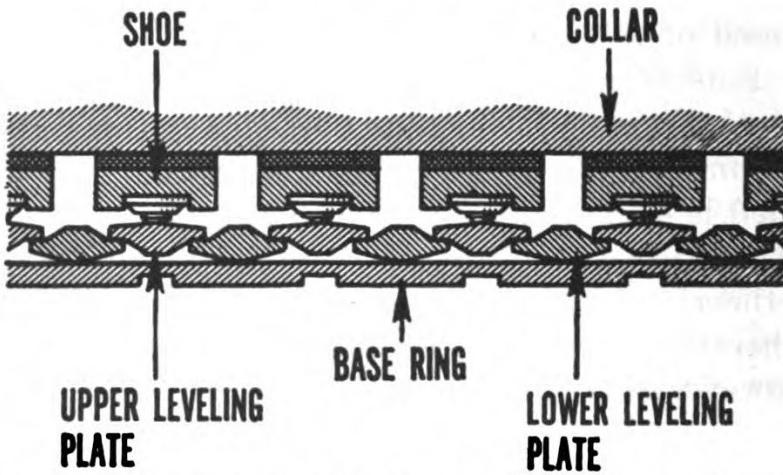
Arrangement of parts in Kingsbury thrust bearing.
